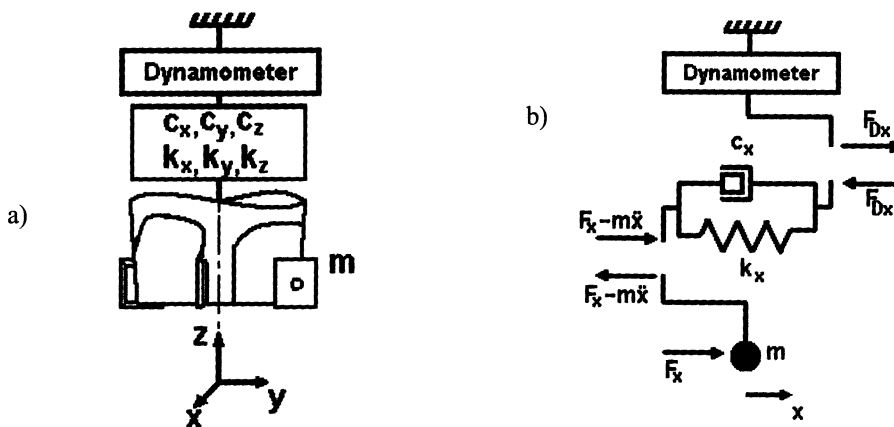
Spring-damping-mass model of tool holder dynamometer: a) 3 dimensional; b) one direction
